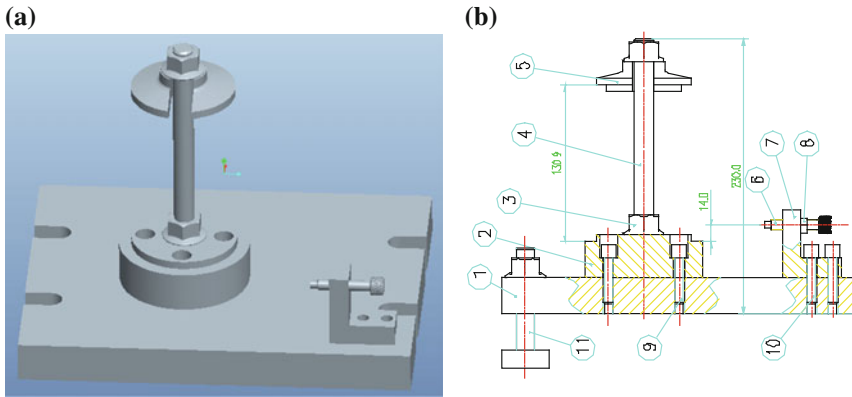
The drawings of a mechanical fixture. a The solid model. b An engineering drawing
